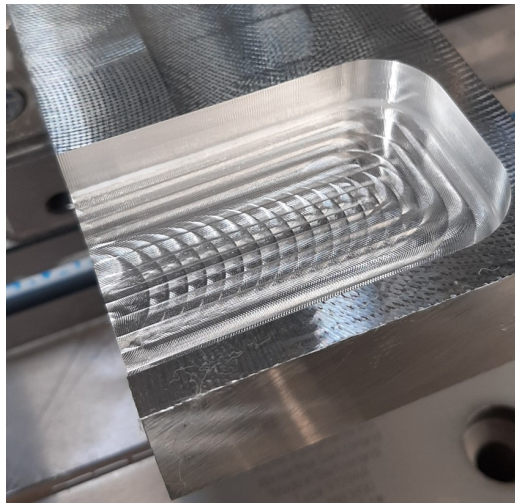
Machined AL7075 pocket using a trochoidal toolpath
